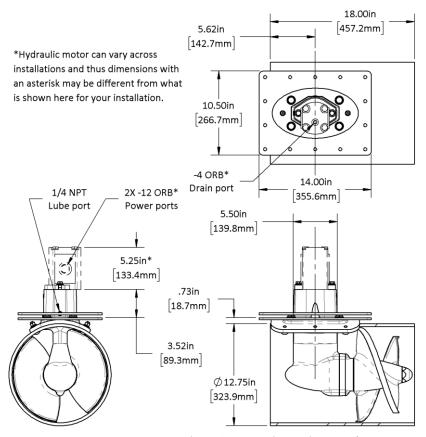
Transom mounted KP12 & KP12 HD thruster dimensions\
